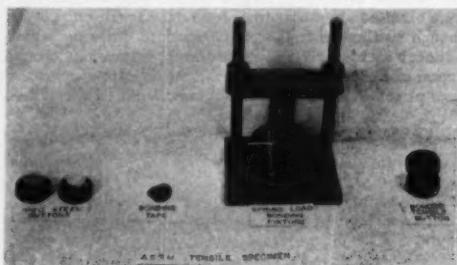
METHOD USED TO ASSEMBLE TEST SPECIMENS
